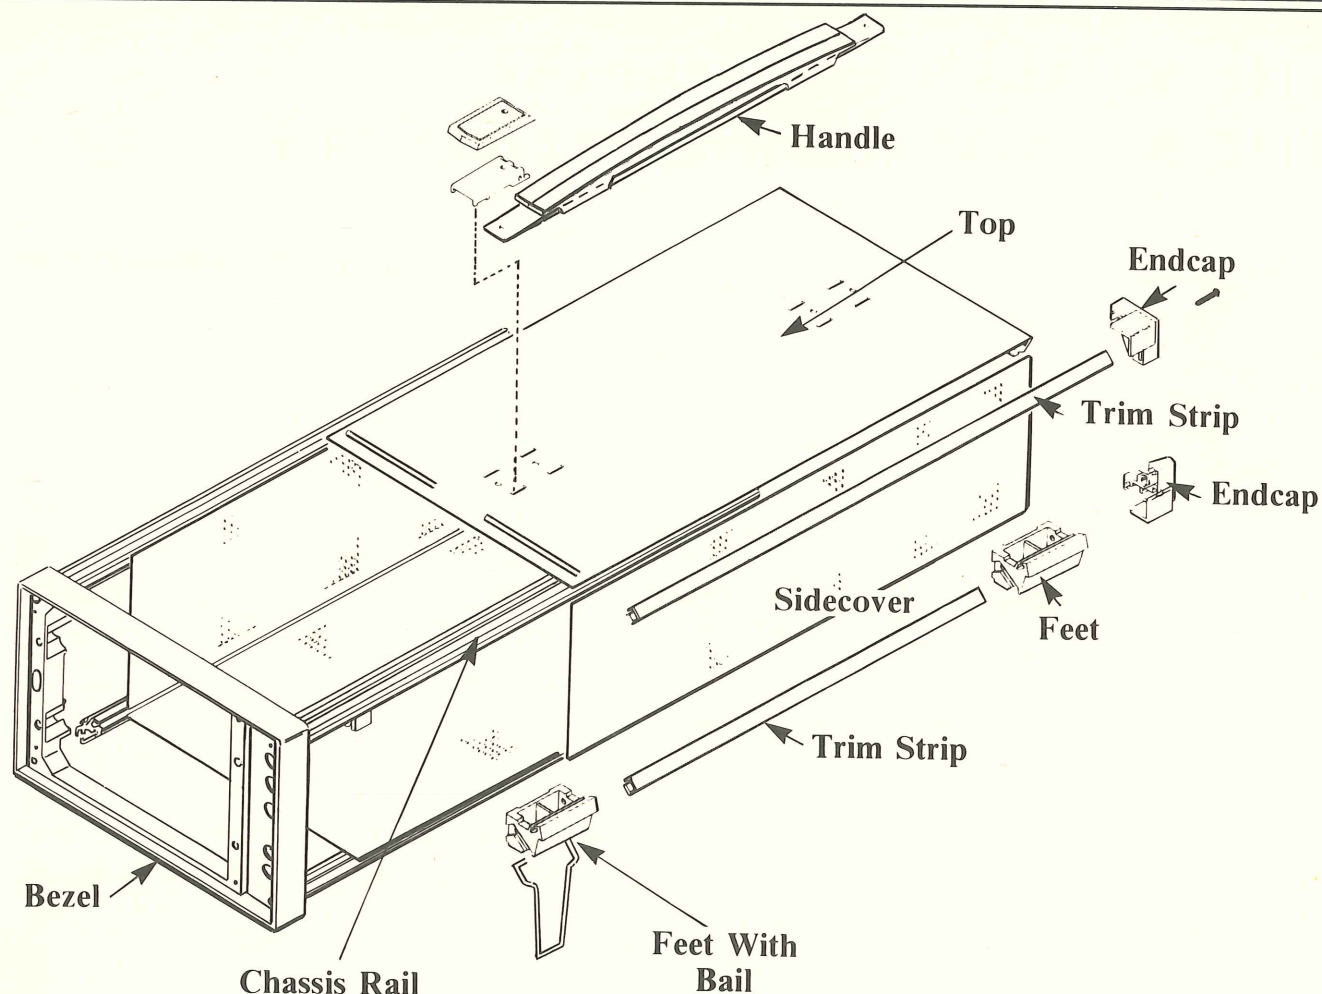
The Modular Packaging System (MPS) dramatically cuts down the number of parts used in a typical enclosure compared to previous packaging methods. For example, this exploded view of a 634 Video Display's MPS packaging has approximately 12 parts and is half-rack width. It is a basic enclosure made up of MPS parts, which will be used for many instruments.
